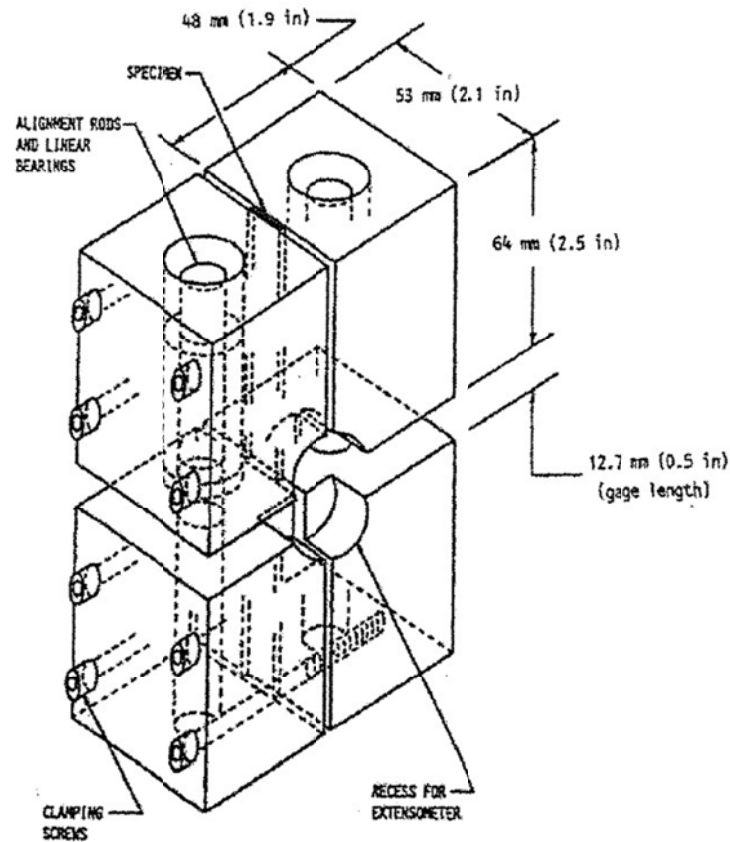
Combined Loading Compression (CLC) Test Fixture [8]
